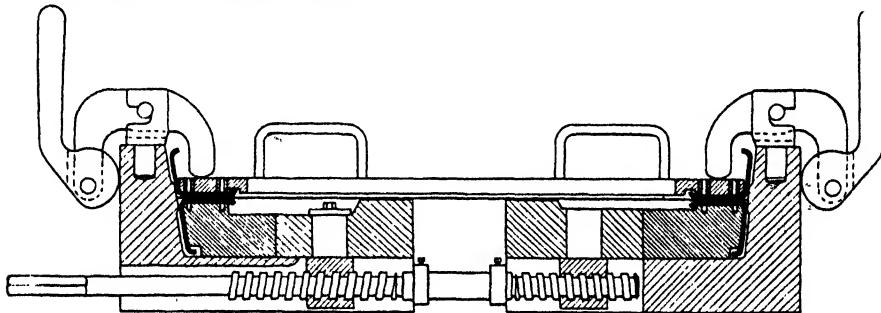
Cross-section of the main plane spar-drilling jig.
